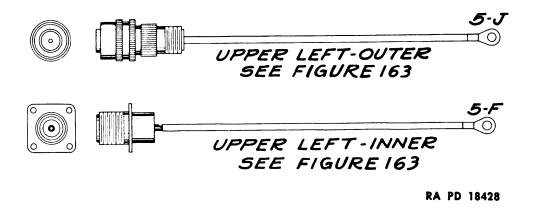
Wiring Harness — Upper Left — Outer and Inner
